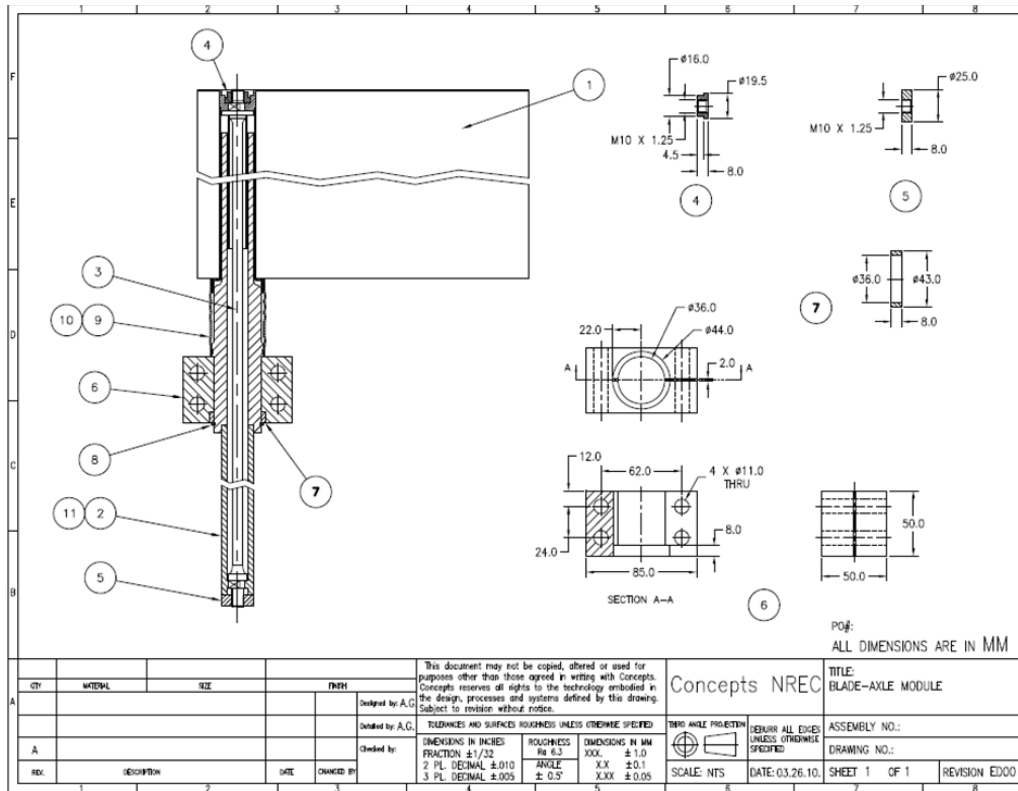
Detailed design planned for prototype test in Woburn or Wilder
